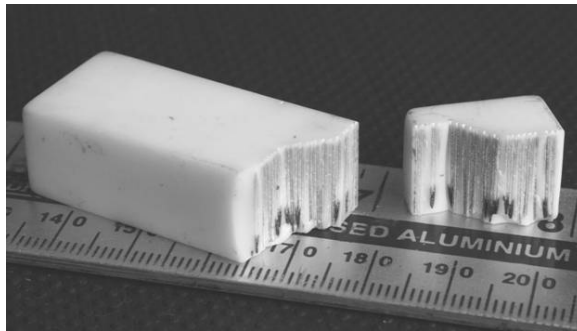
Laser cutting using a technique of controlled crack propagation [115]. 13 mm sample cut with fibre laser.
